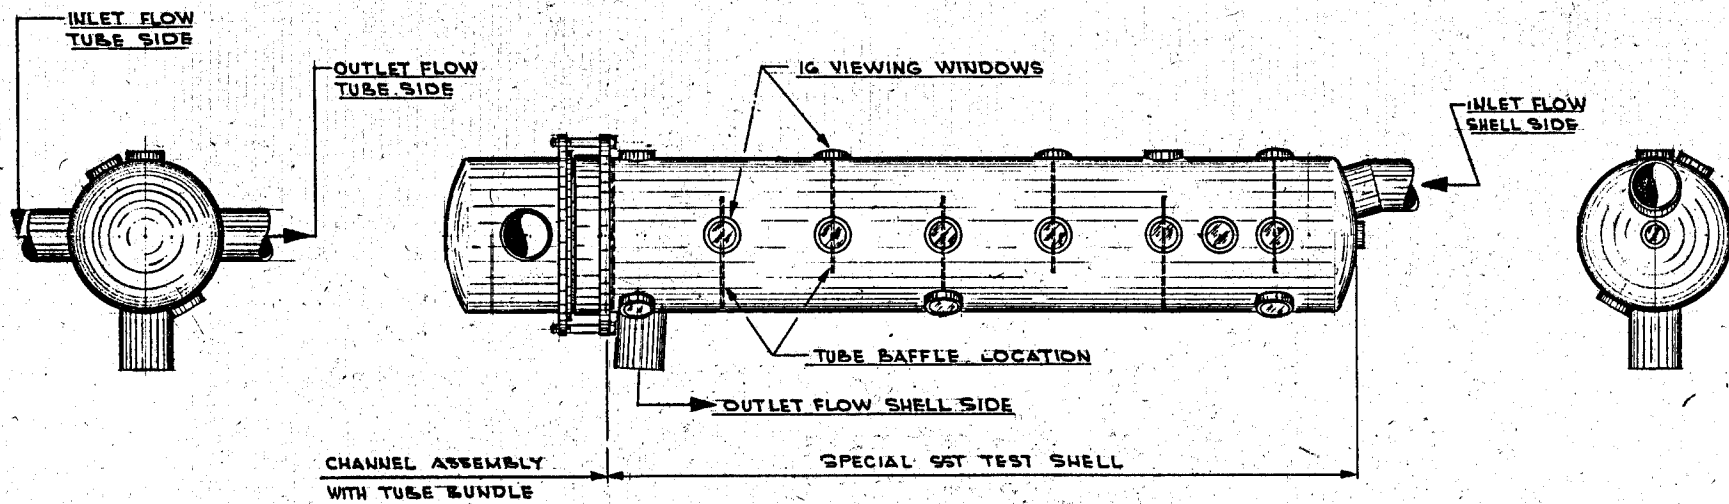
Hydraulic Test Shell Assembly, Primary Heat Exchanger.
